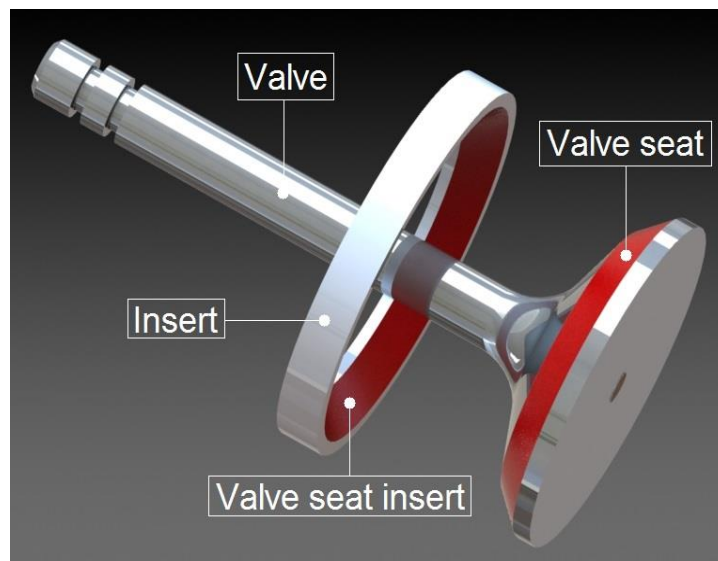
Drawing in perspective of the valve seat and valve seat insert positioning.
